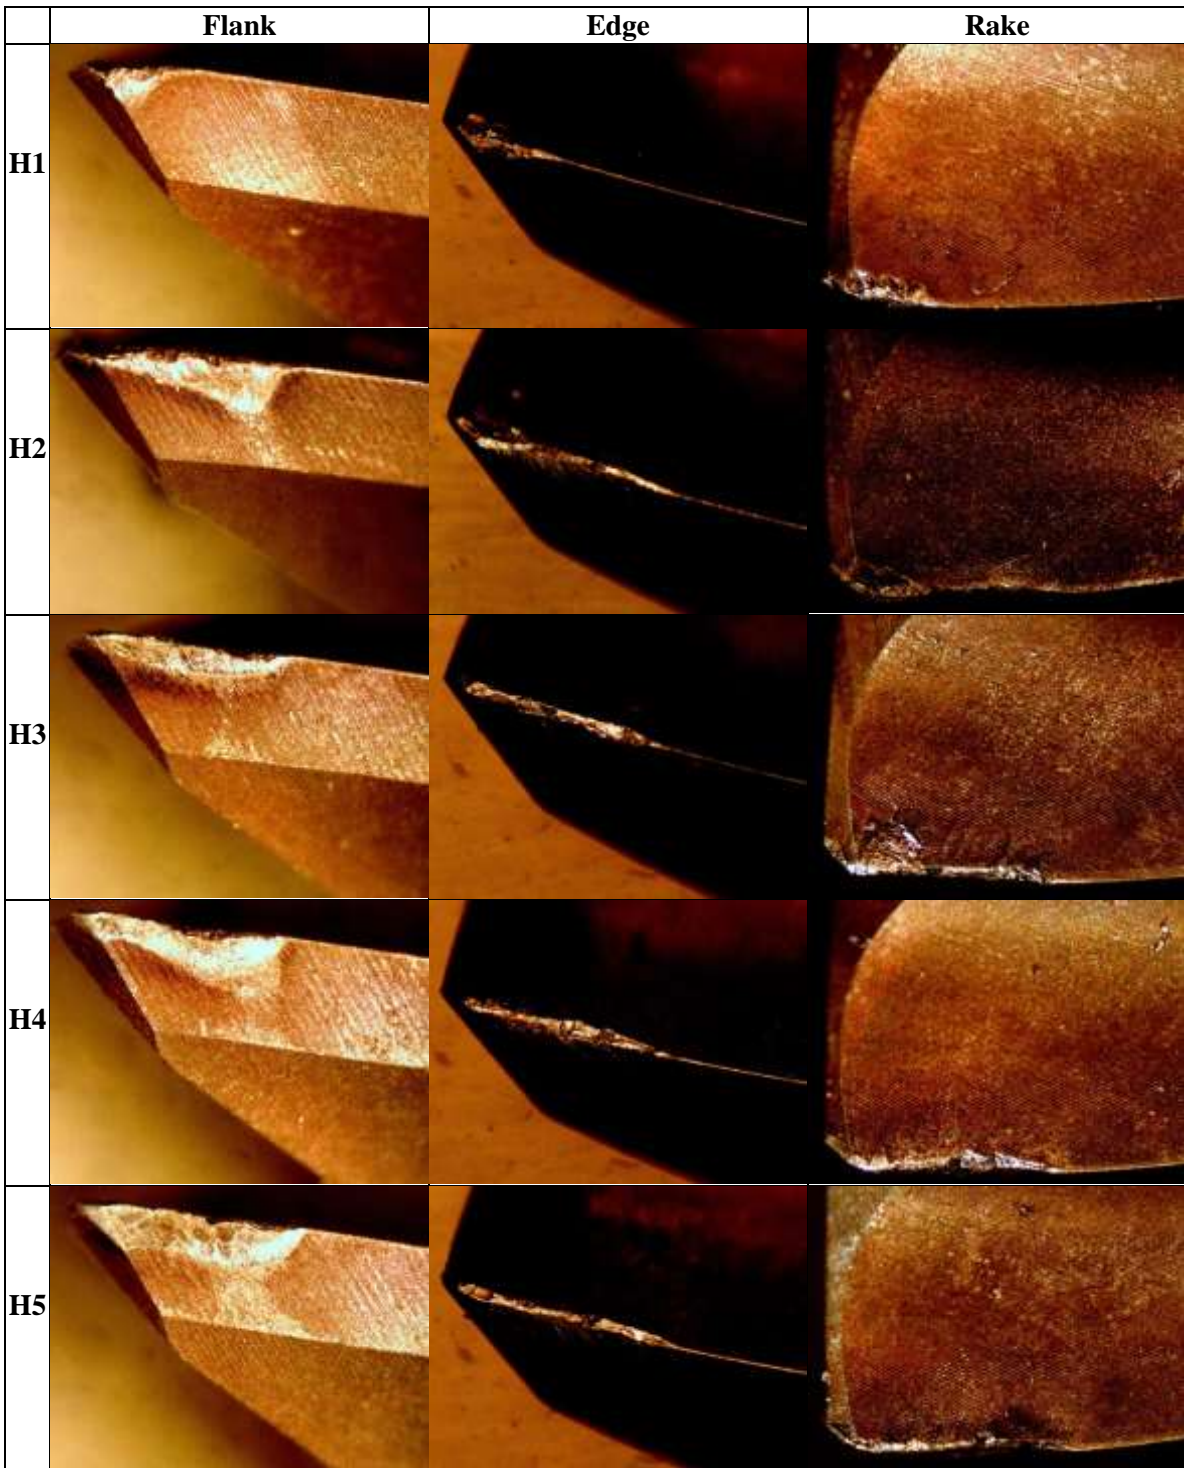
Images of tool with three views at rake face, cutting edge, and flank face at different cutting speeds; 60, 90, 120, 150, 180 m/min under hybrid cryogenic/MQL, taken after the wear criterion has been reached
